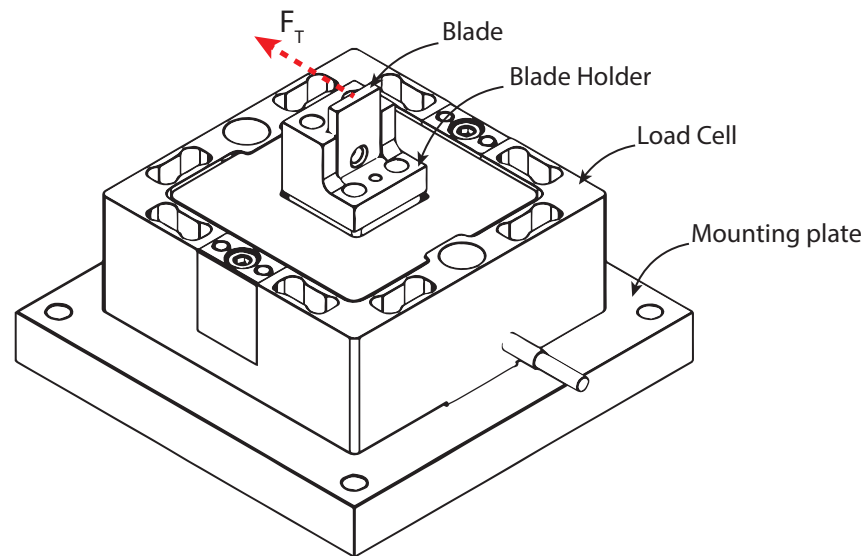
Load cell assembly: blade, blade holder, load cell, base mounting plate
